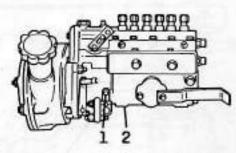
View showing location of filler plug (1) and drain plug (2).
